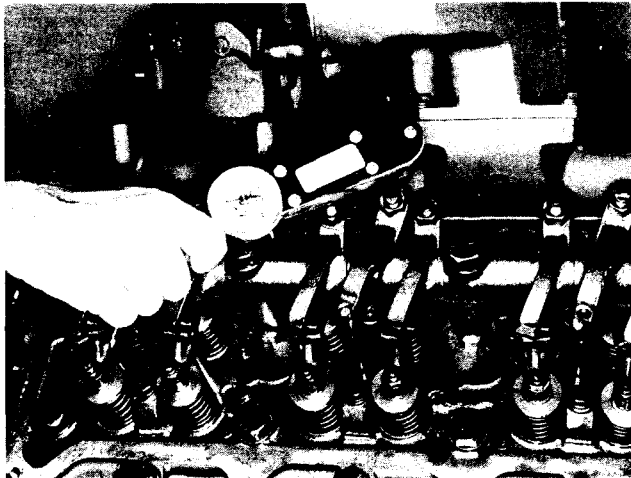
(V51488) Adjusting injector plunger V-378
